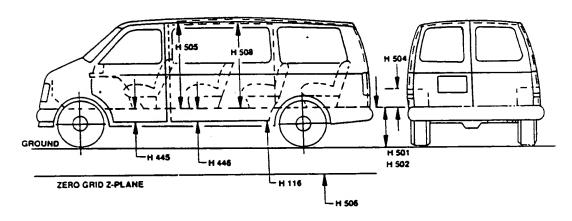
TRUCK-CARGO SPACE DIMENSIONS, HEIGHT
